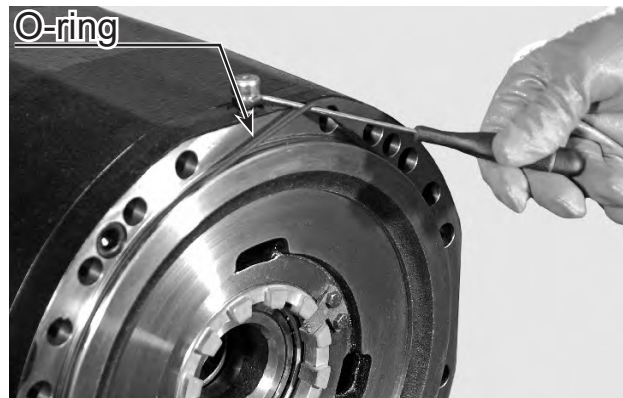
Check integrity and position of the cylinder's o-ring.
